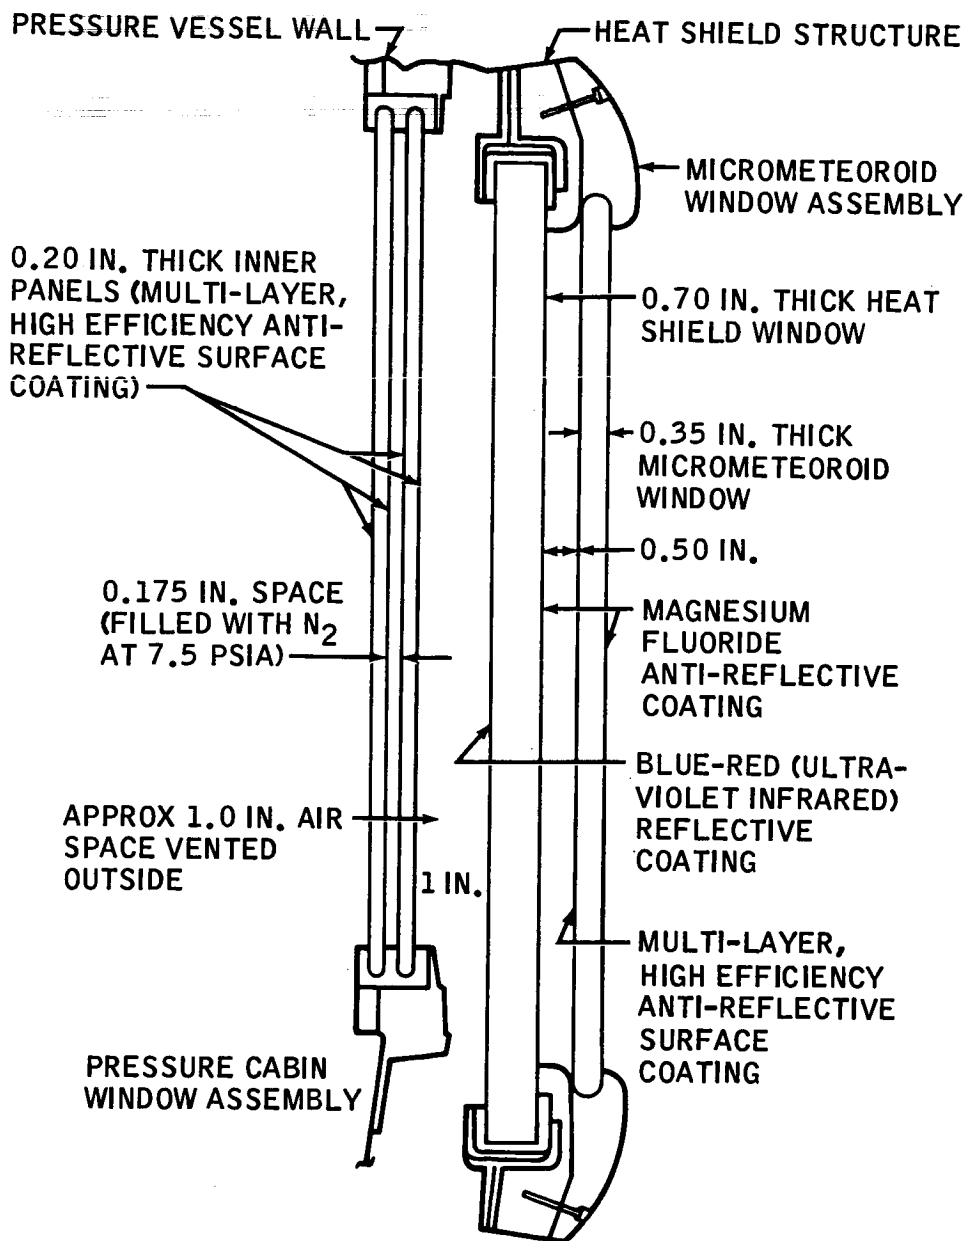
COMMAND MODULE WINDOW ASSEMBLY.
